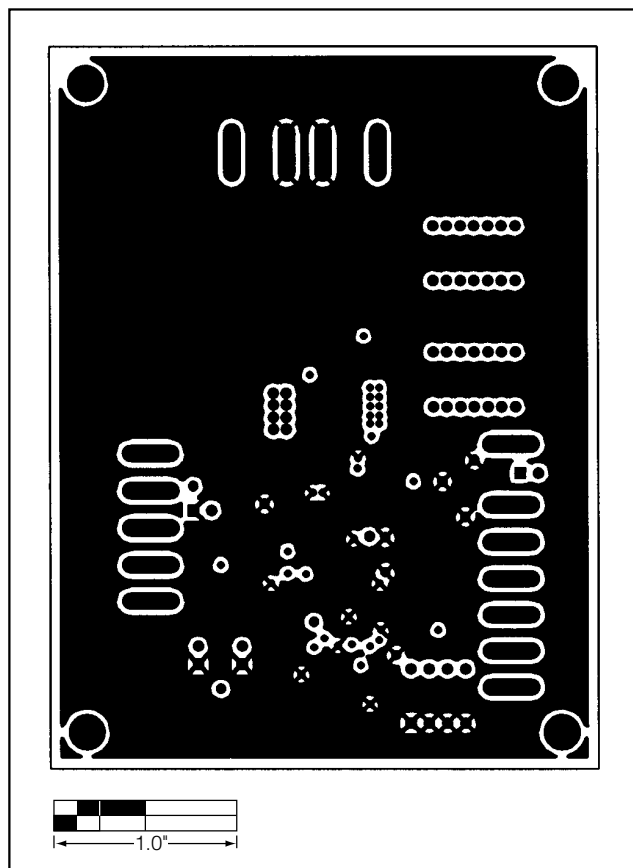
MAX1636 EV Kit PC Board Layout—Two Internal GND Planes
